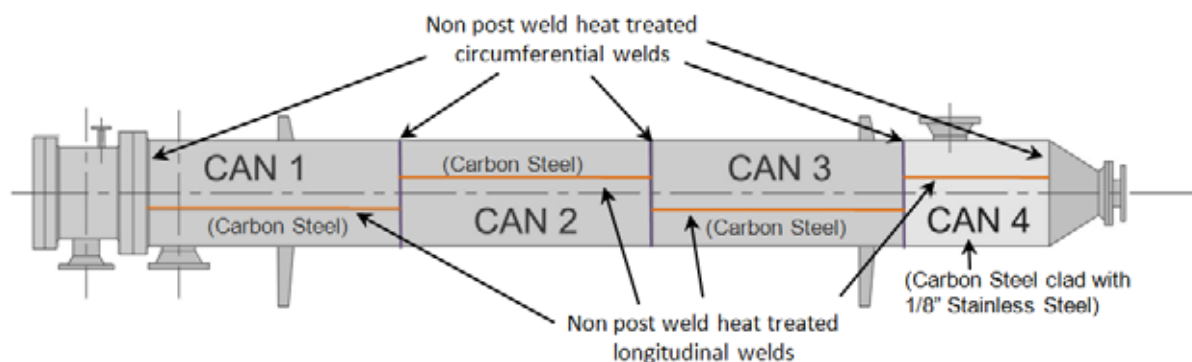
Fabrication Layout of the B and E Heat Exchangers
